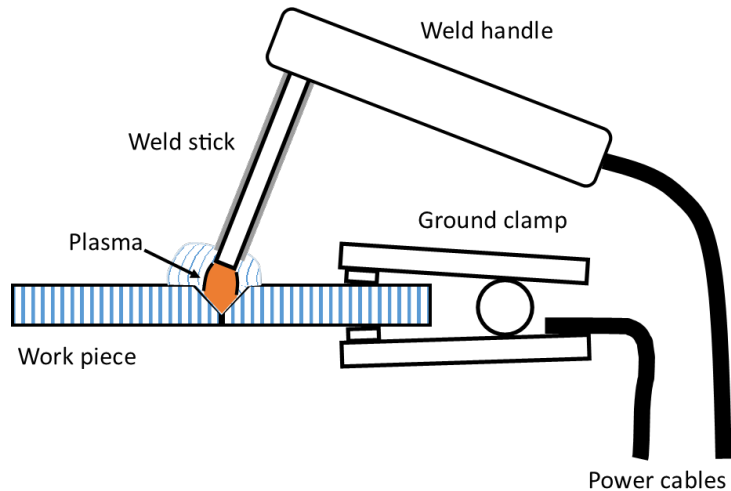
MMA welding principle showing weld region with work piece, weld stick, and ground clamp.
